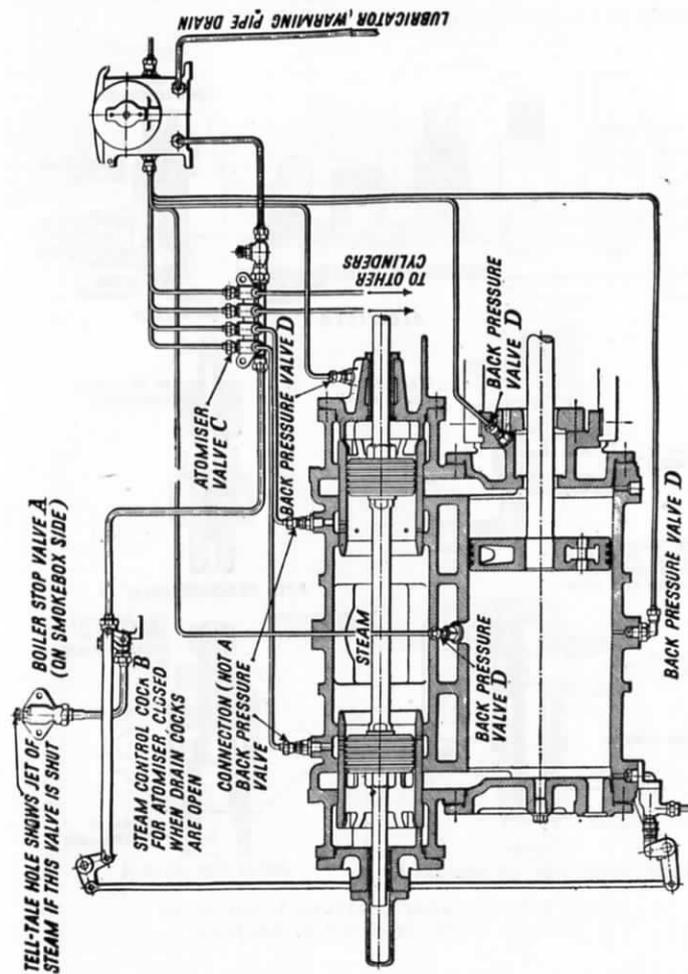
SECTION THROUGH LOCOMOTIVE CYLINDER AND STEAMCHEST, SHOWING ARRANGEMENT OF ATOMISER LUBRICATION SYSTEM, L.M.S.R.
